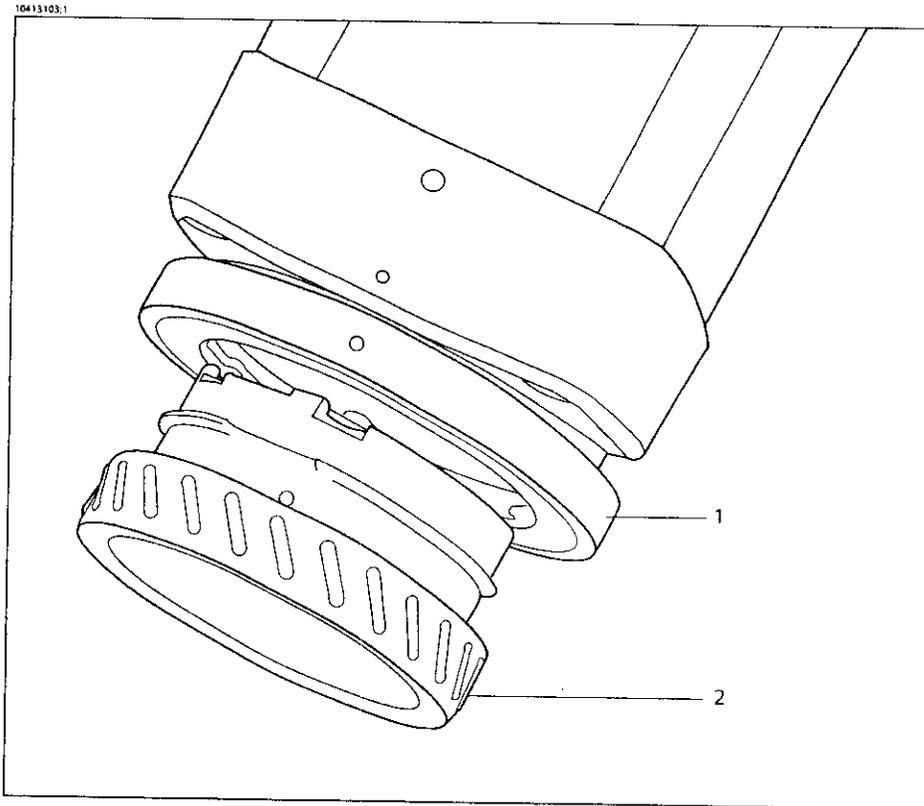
Removing a lens. 1: Locking ring; 2: Focus ring
